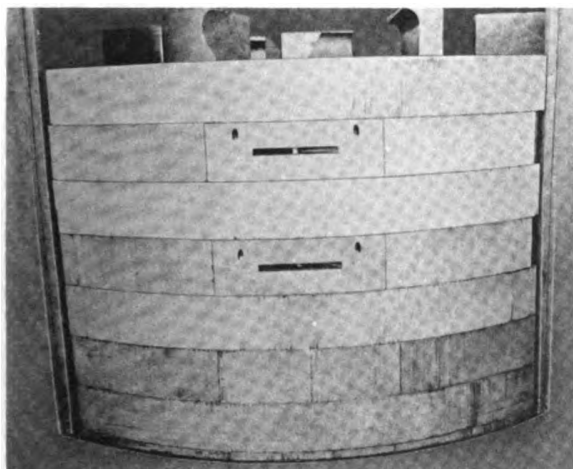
Reflector tank during assembly with the flange assembly removed, showing provision for horizontal thermal column.
